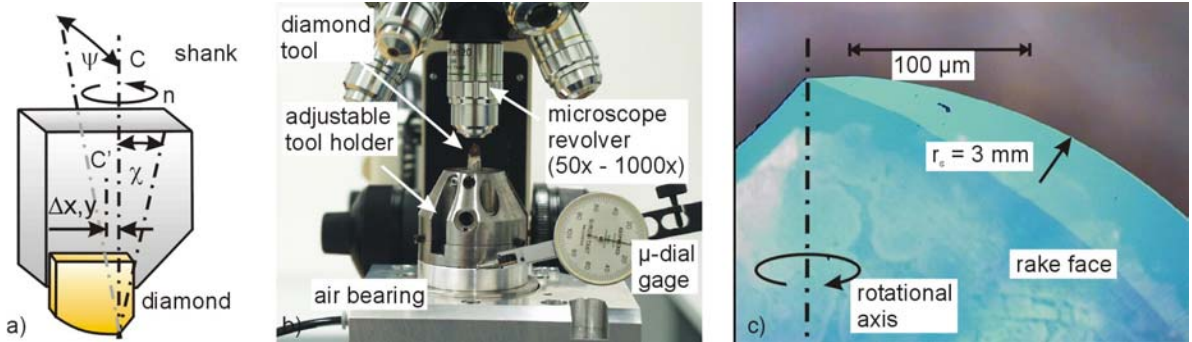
Schematic view of a half-arc ball-end milling tool and degrees of freedom for alignment (a), setup for alignment with an optical microscope (b), view on the rake face of a half-arc diamond ball-end milling tool (c).
